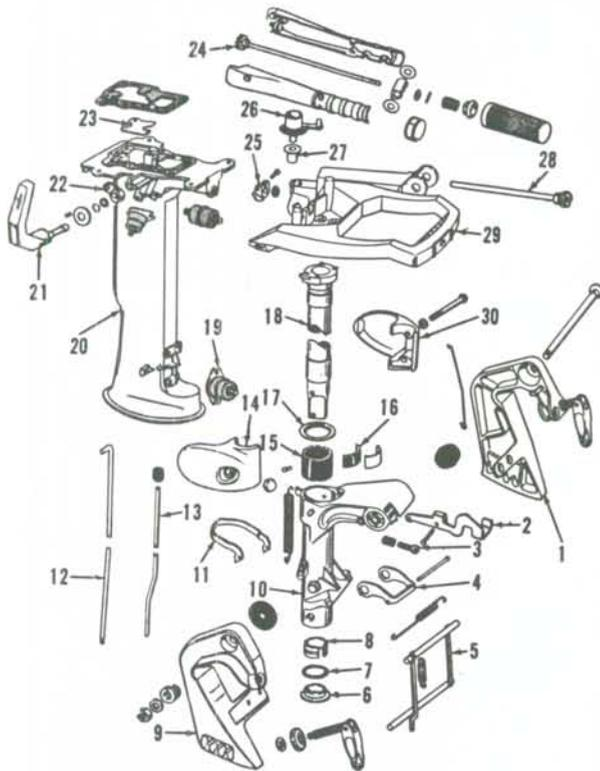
Exploded view of exhaust housing, stern clamps and associated parts used on 6 hp models.
